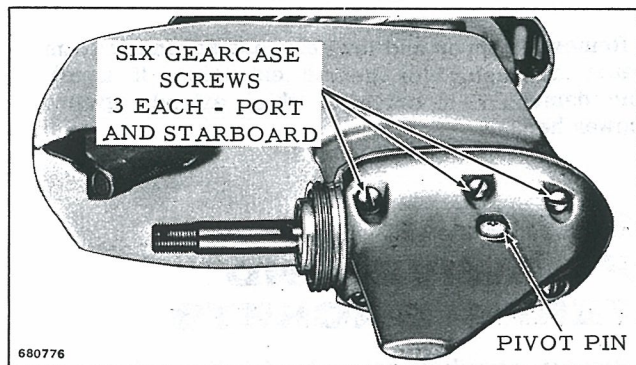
Gearcase Pivot Pin and Attaching Screws
